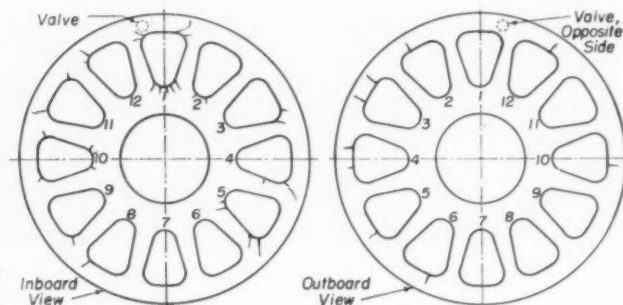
Cracks on Inboard and Outboard Sides of Aircraft Wheel After Roll Test
